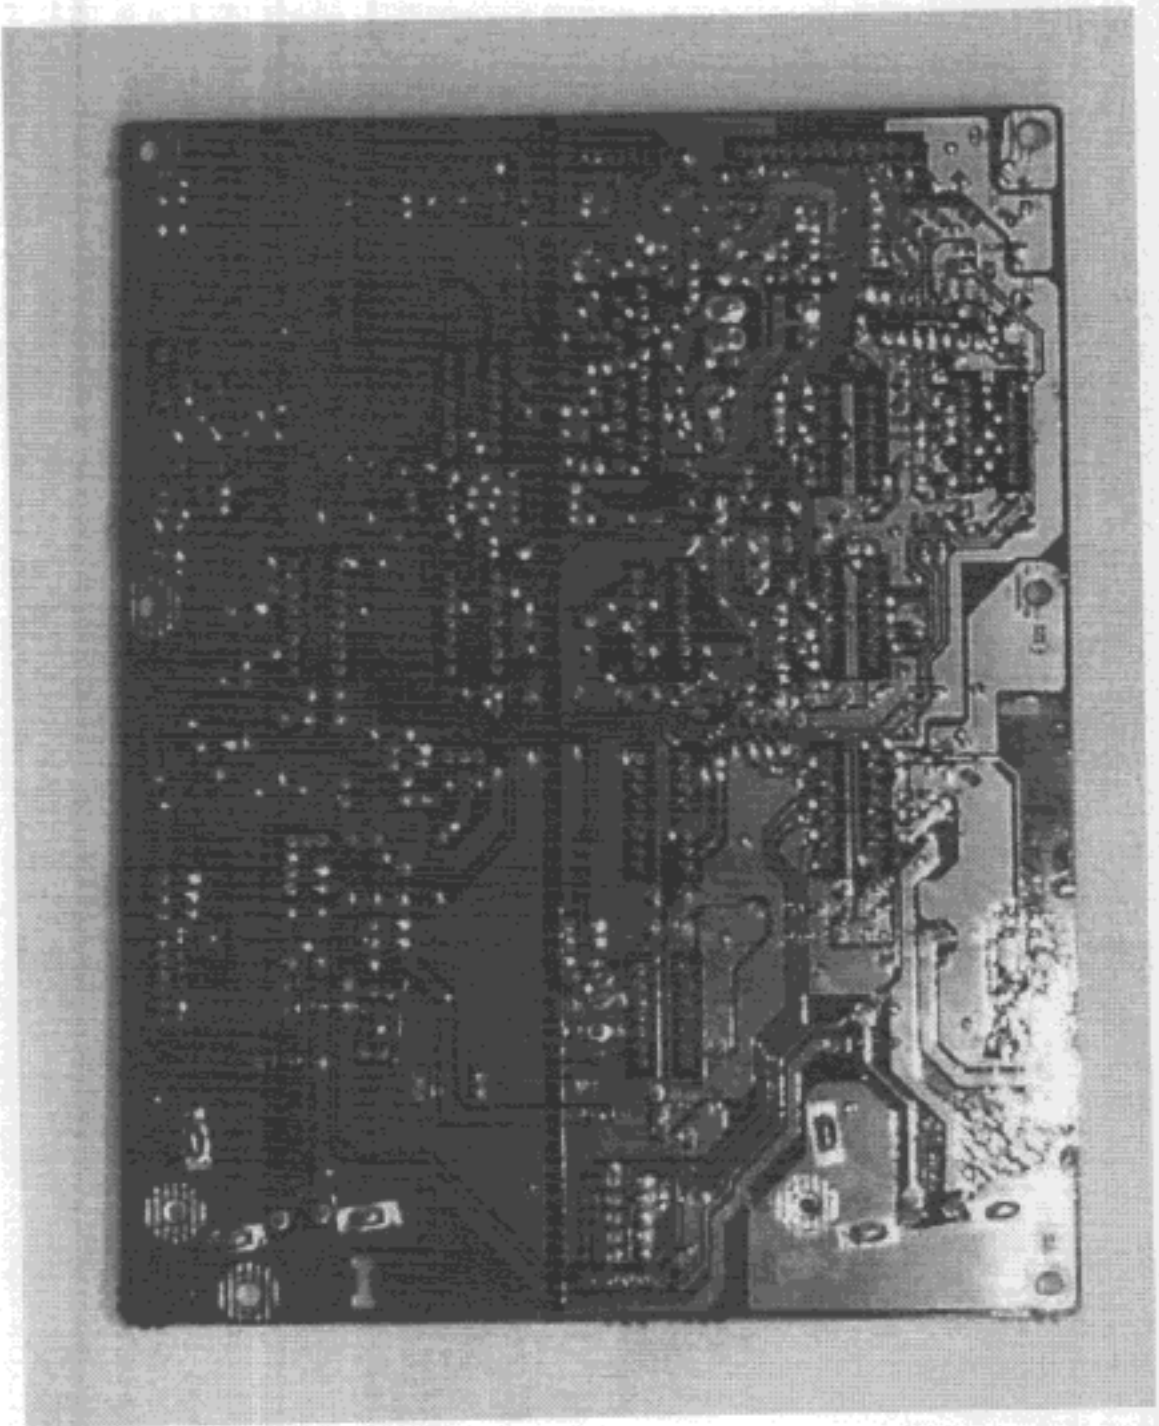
Bottom view of 2nd Cassette Feeder Board.
